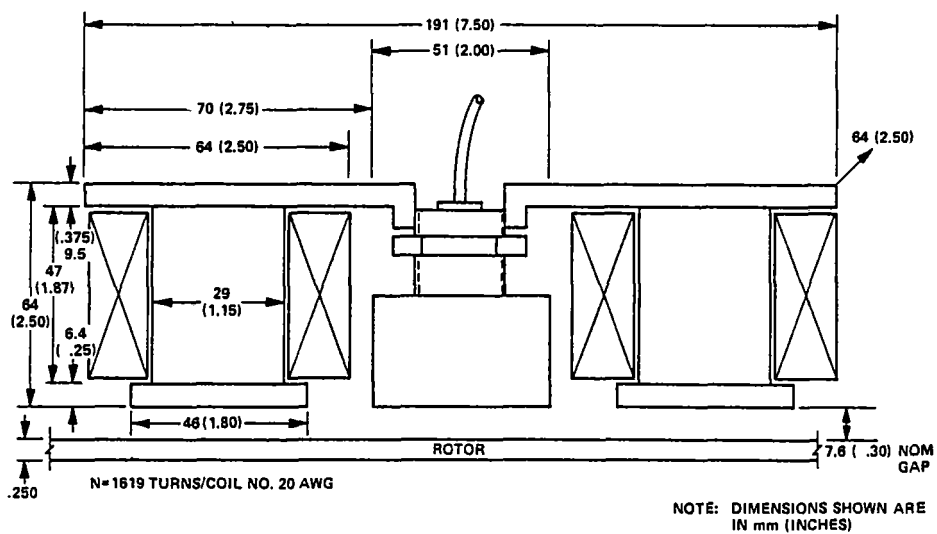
Axial MBA Configuration (lower coils omitted for clarity)
